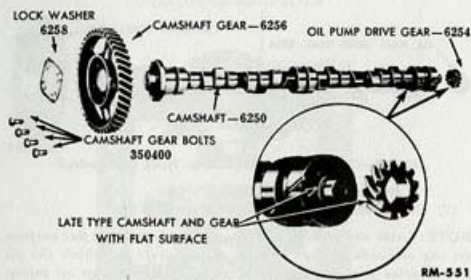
Camshaft Assembly (Bolt-on Type), Disassembled
